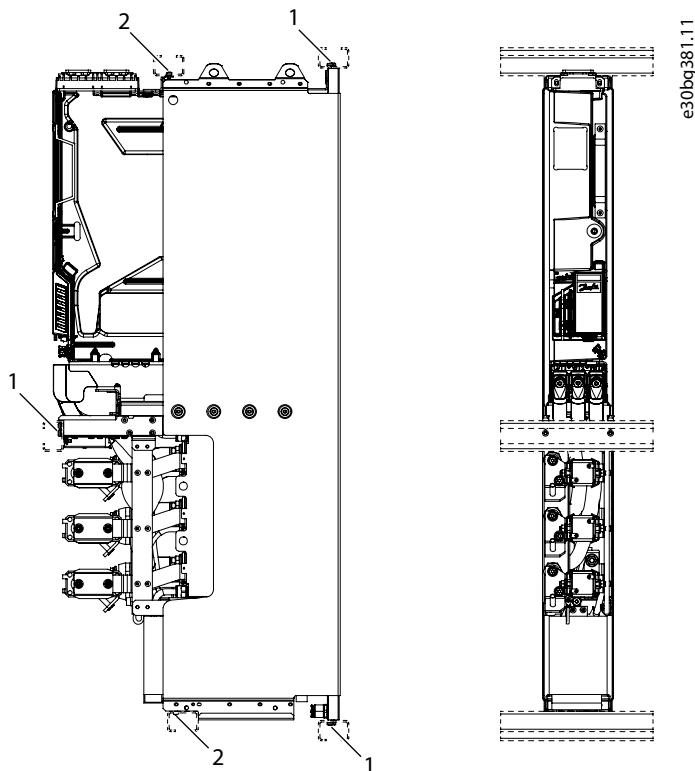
Mounting Holes of the System Module, AFE with the Integration Unit
